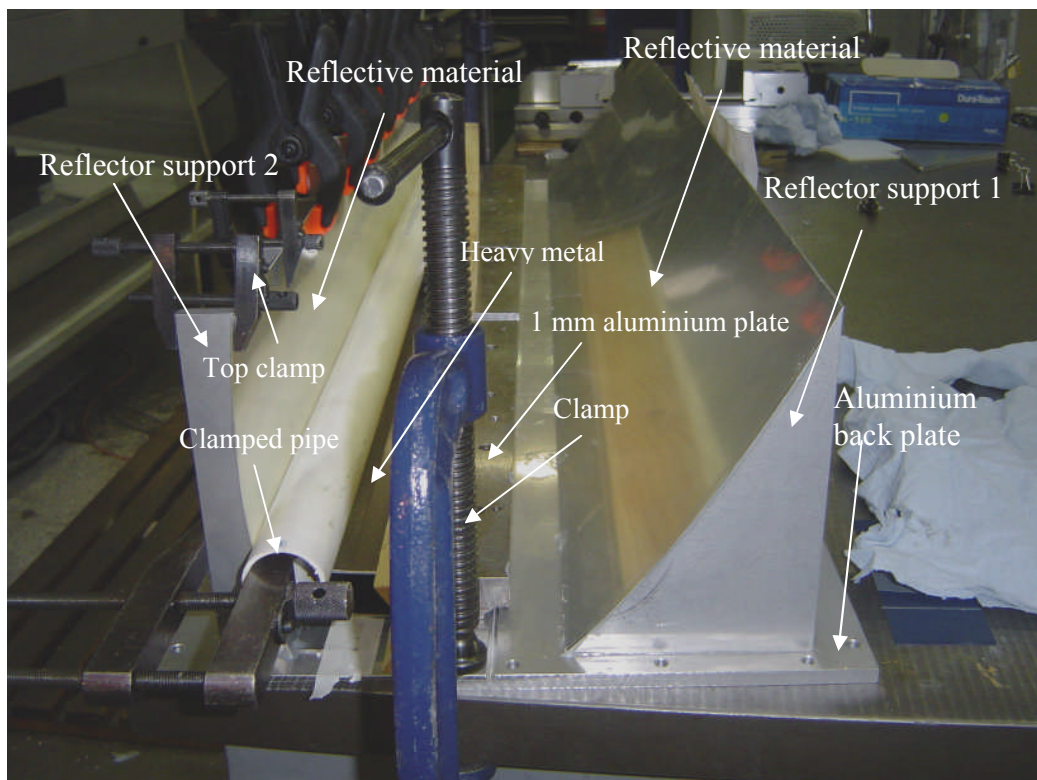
Attaching the reflective miro sheet to the reflector supports
